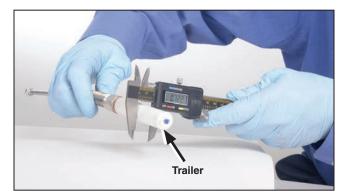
Measure the diameter of the trailer. Do not measure the chamfered ends.
